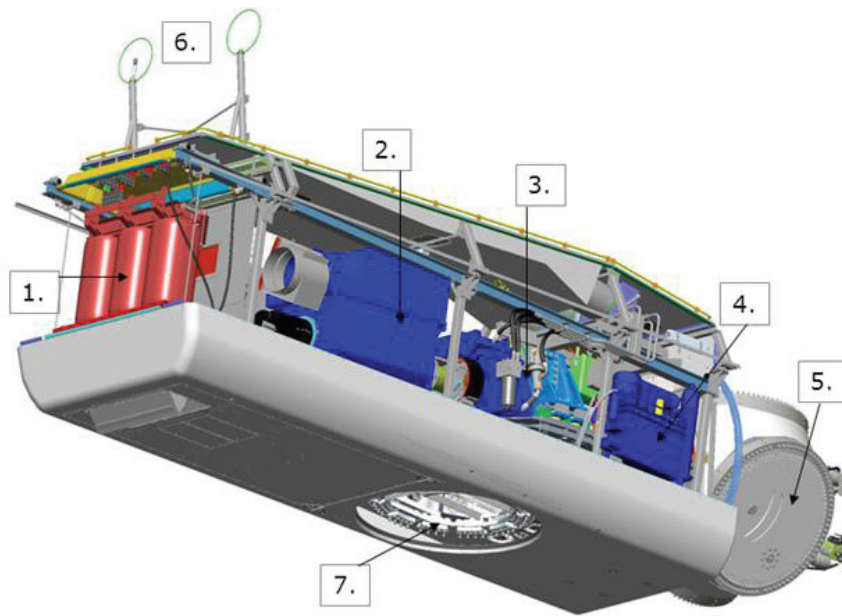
Parts of the nacelle: 1, transformer; 2, alternator; 3, gearbox; 4, hydraulic equipment; 5, blade pitch regulation system; 6, weather sensors; 7, yaw system.
